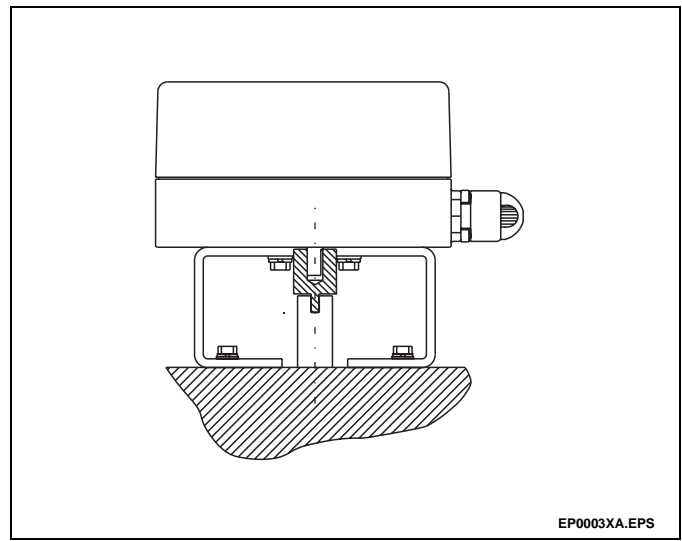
Mounting to rotary actuators to VDI/VDE 3845
